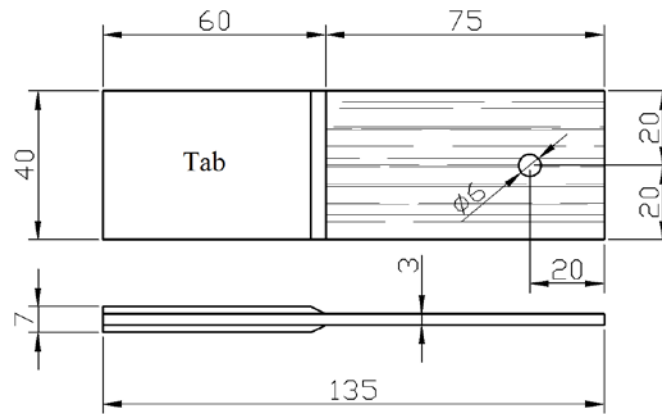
Dimensions of the pin bearing specimen types G, H and I.
